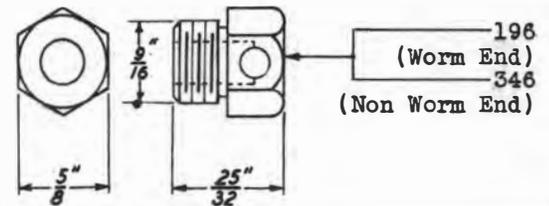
Filling Plug - Collar H. Plug (Vented Plug)
